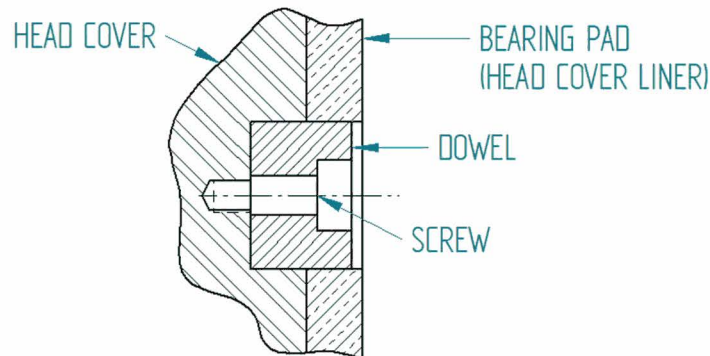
Example Dowel Concept Sketch to Secure Operating Ring Bearing Pads (NTS)
